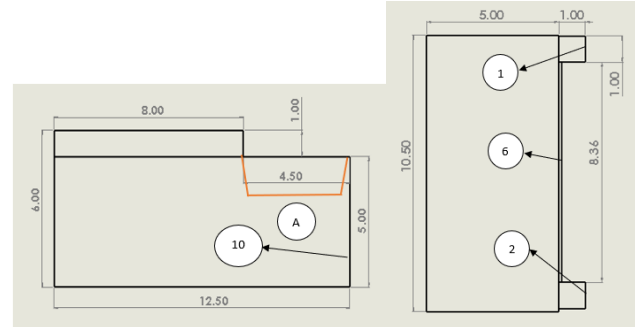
Side-view (left) and top-view (right) of connector (mm)
